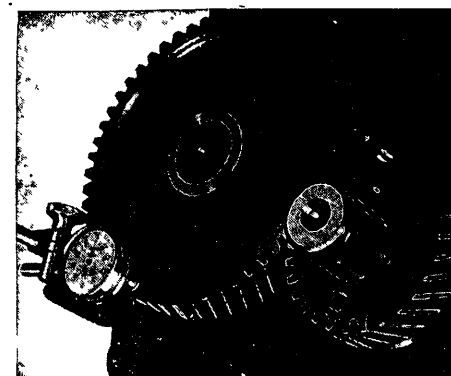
Checking run out of timing gears with dial indicator. 1935-52
